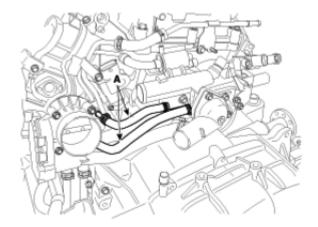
Identifying Throttle Body Coolant Hoses Courtesy of HYUNDAI MOTOR CO.
